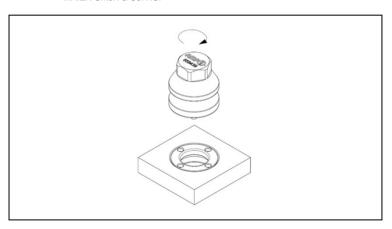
Installation of zero point clamping sleeve 6214ZN-01-01
